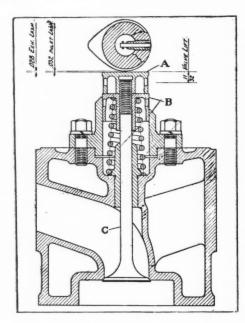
Cross section through Stutz valve passage show operating assembly and oil metering device in heel of cam.
